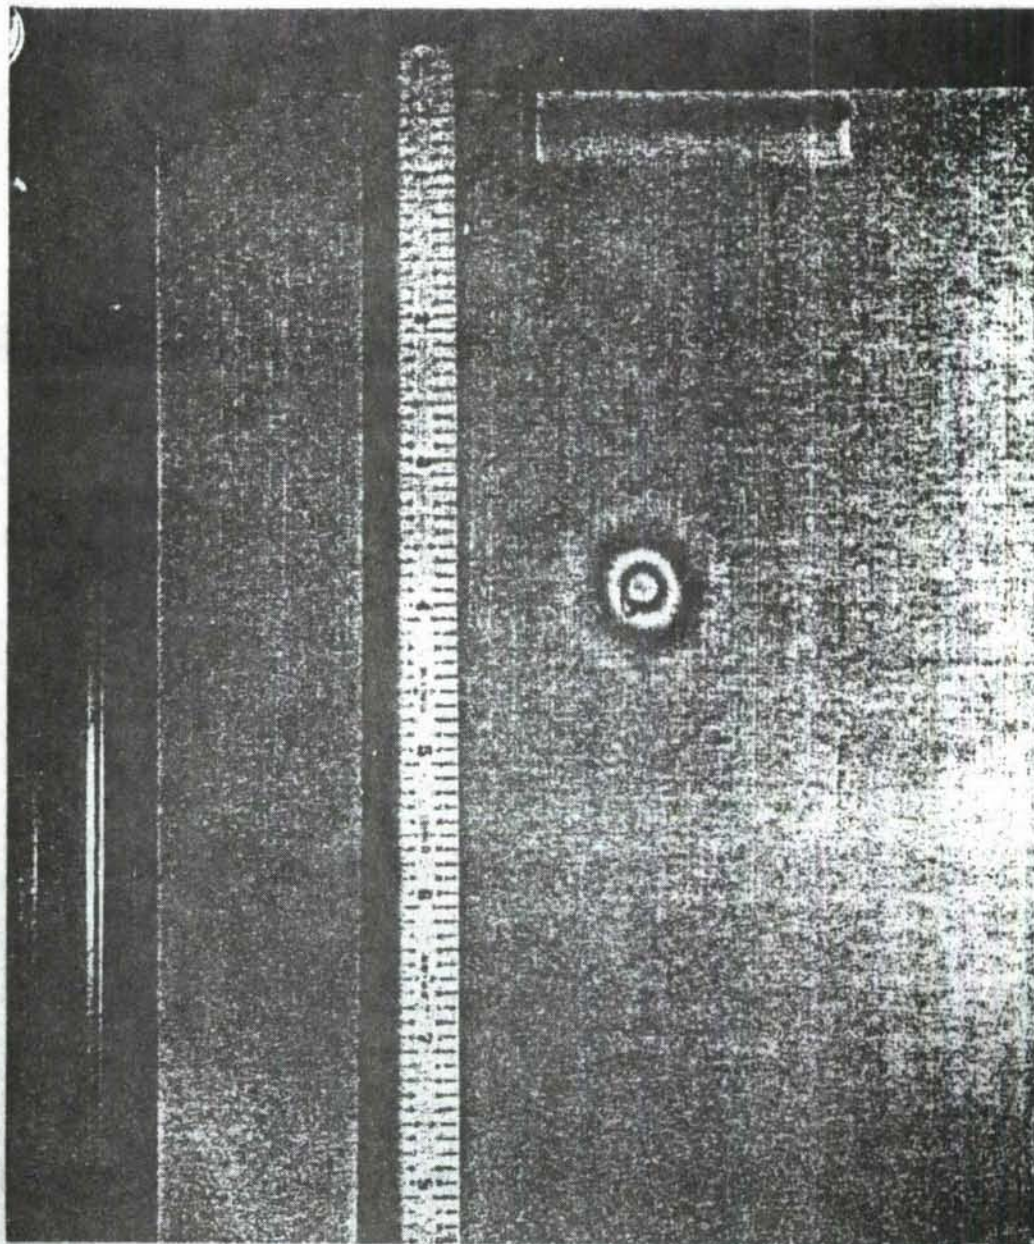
D-Sight image. 7075T6 specimen with cold worked holes.
